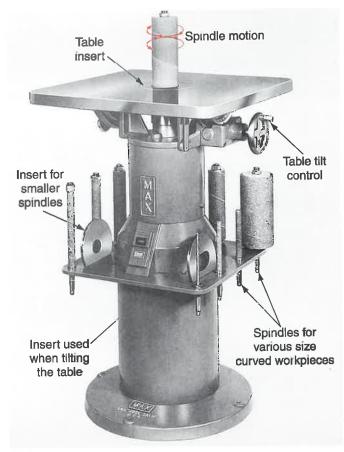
The spindle sander smoothes irregular curves. Install the largest spindle size and table insert to fit the workpiece. (*Brodhead-Garrett*)
